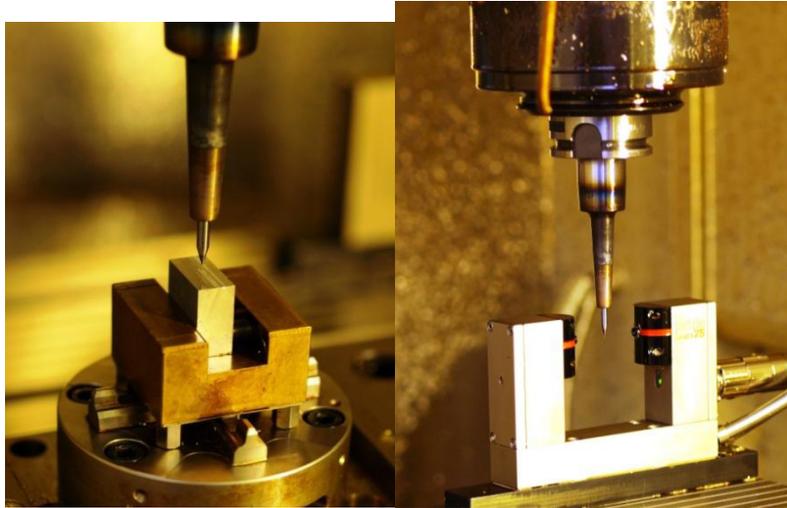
Left: Tool, tool holder, and EROWA© clamping system set-up. Right: Mida Laser Line©.
